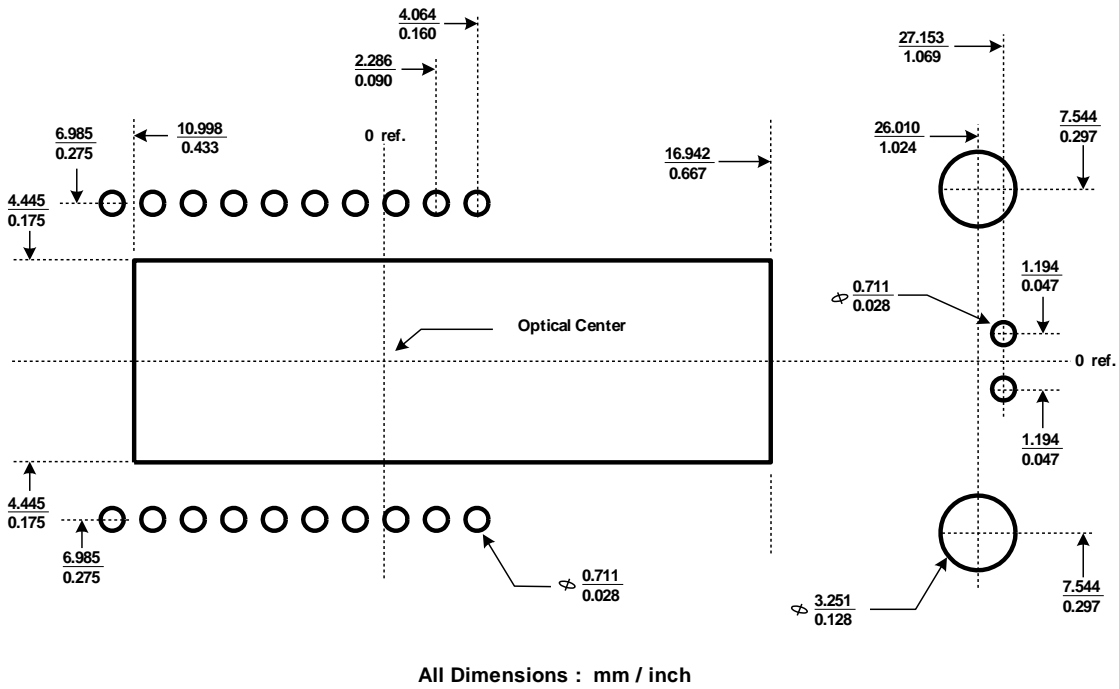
Recommended PCB Mechanical Cutouts and Spacing
